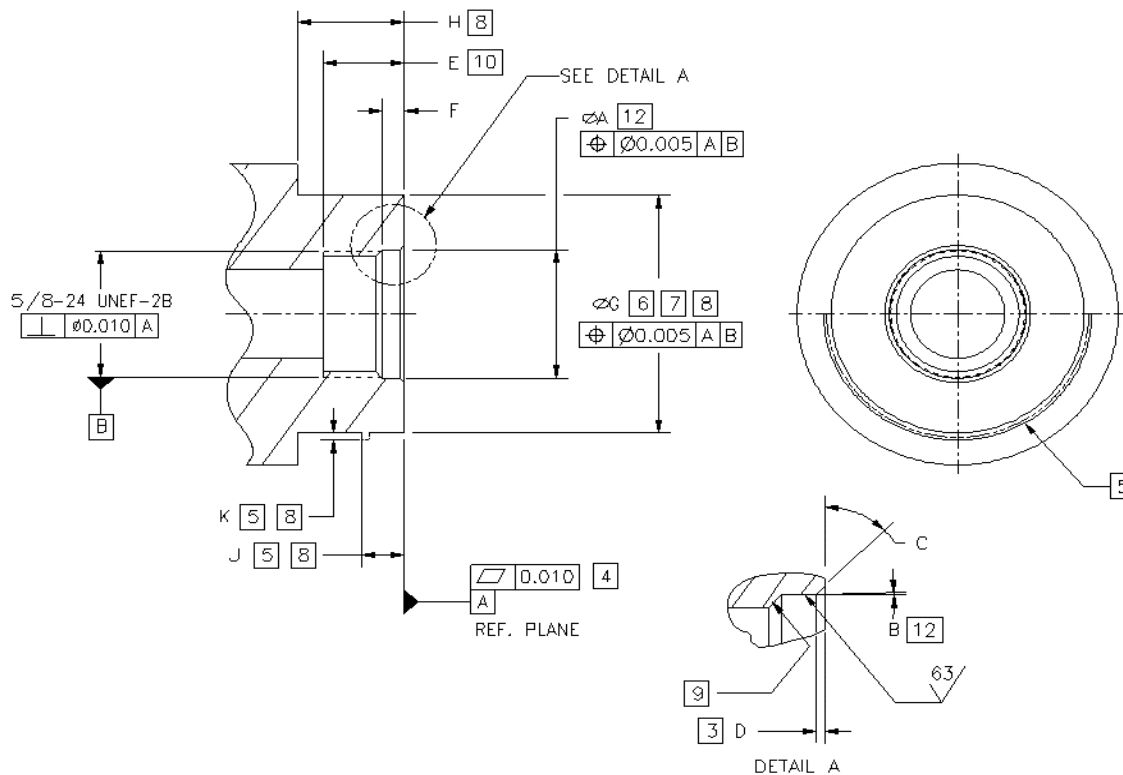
Physical Dimensions of 5/8-24 RF & AC Equipment Port – Female
